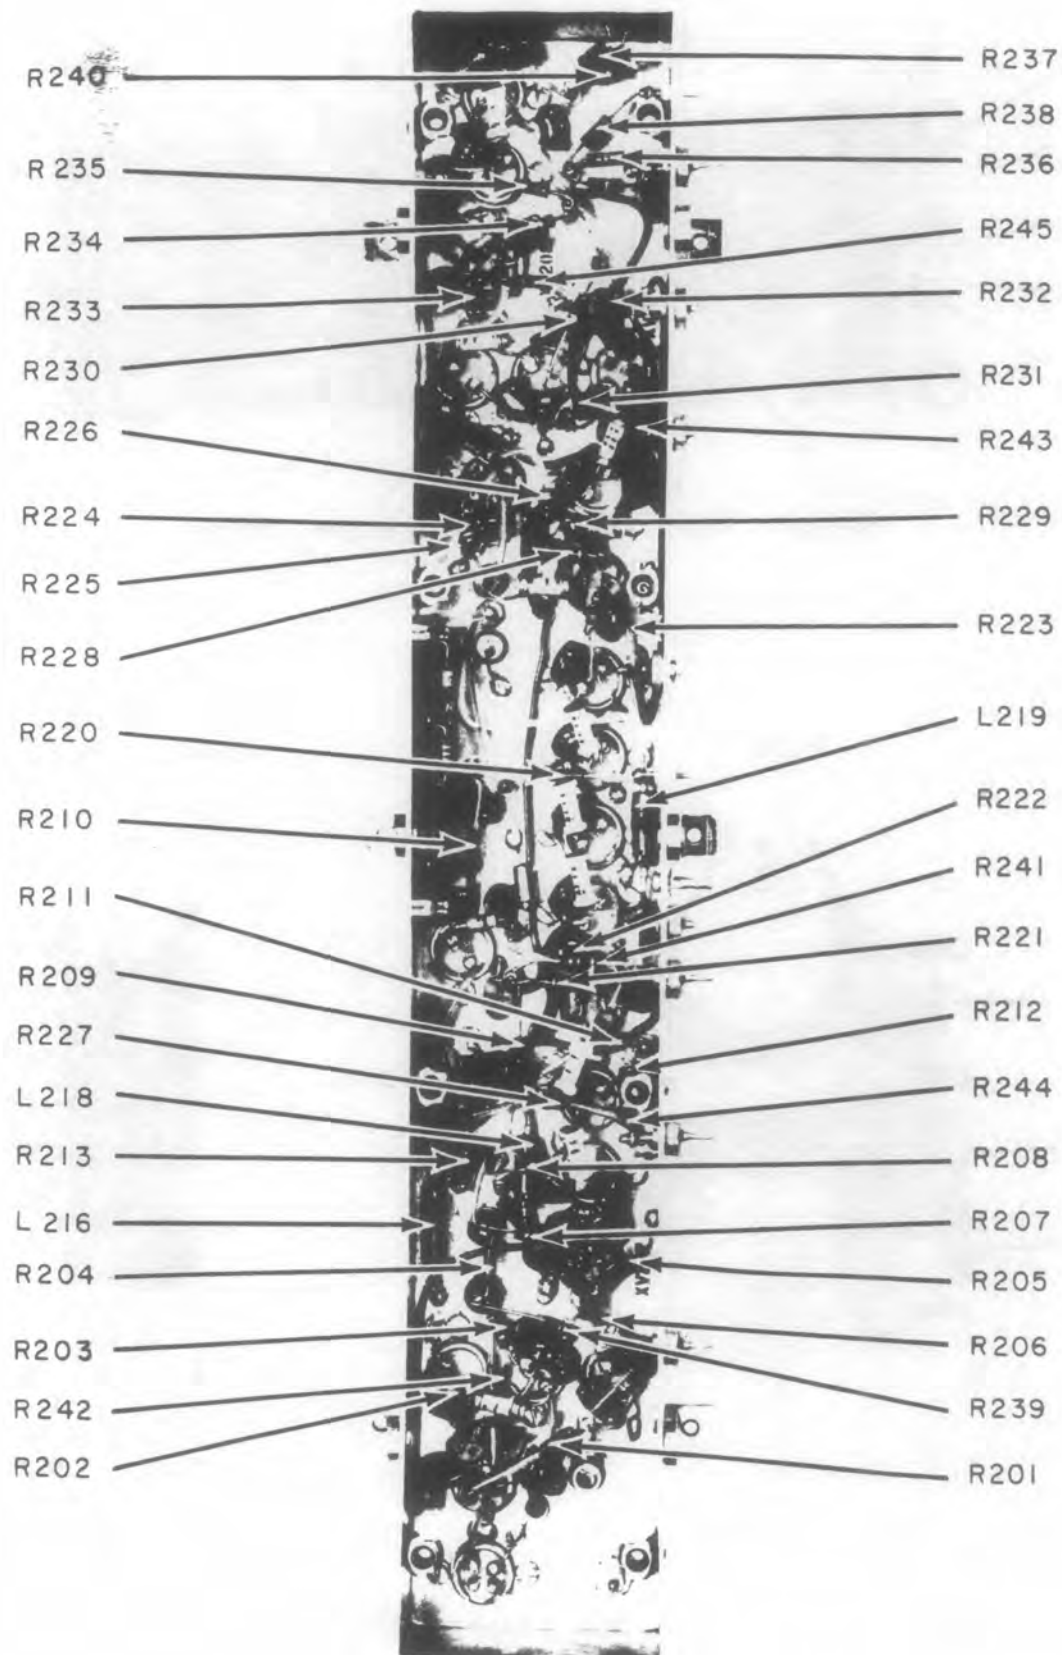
SM-9310A, Subassembly Chassis, Resistor and Inductor Location
